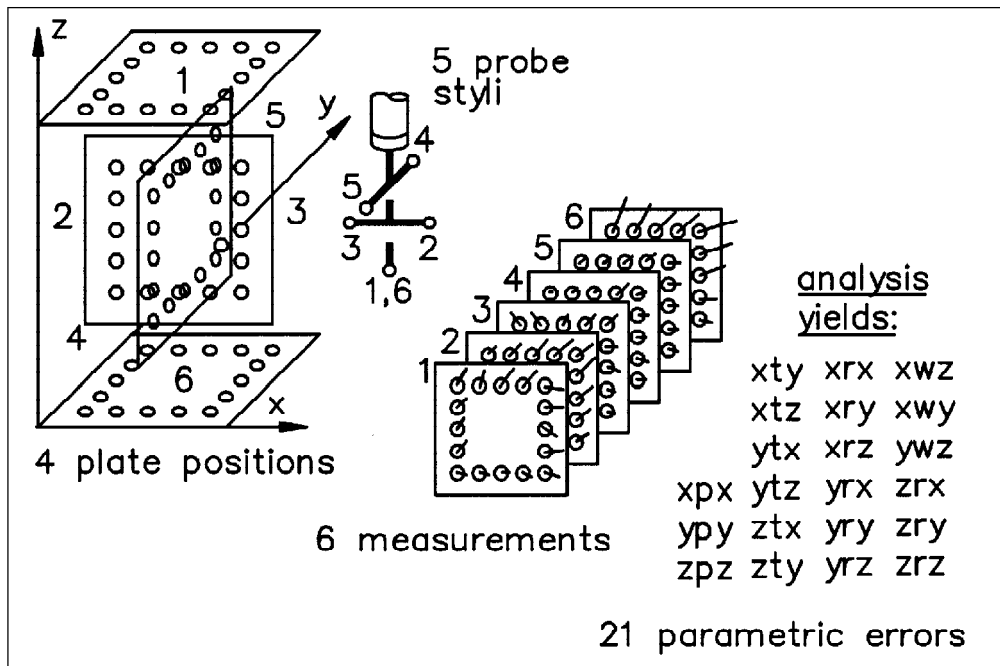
The measurement procedure for assessing the 21 parametric errors of a CMM using a hole-plate
